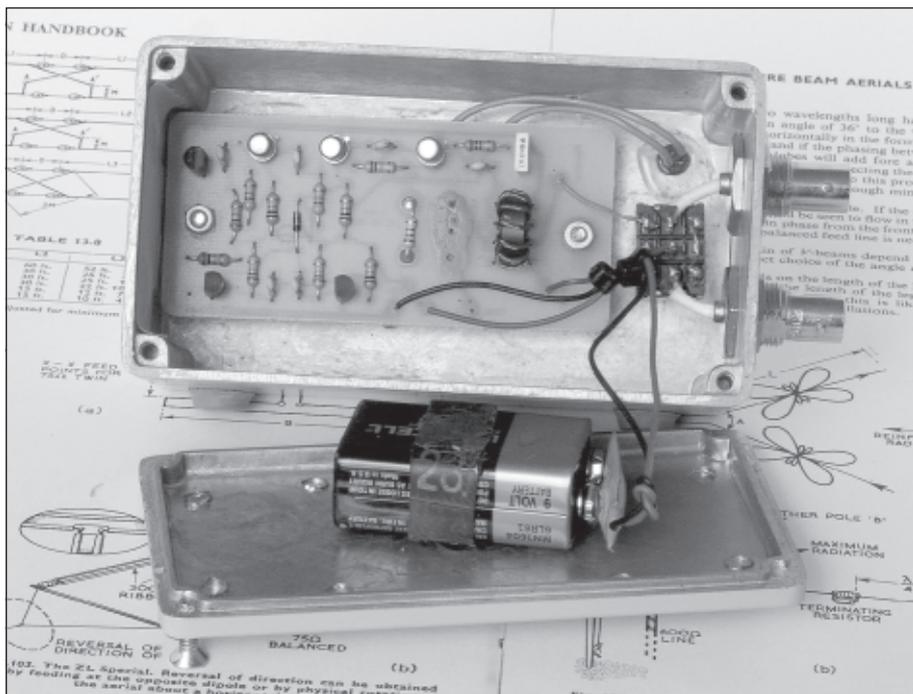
The mounting of the PCB inside the diecast aluminium box.
